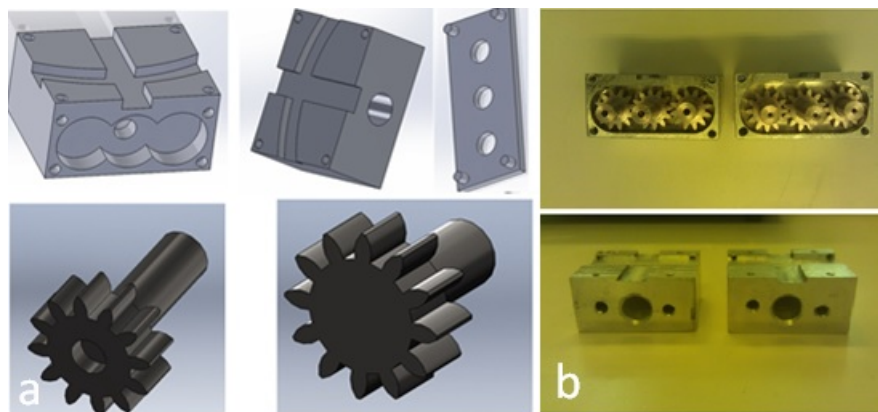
a) Target holder and rotation system drawings designed to place cylindrical catheter shafts (up to three samples) in “Solidworks” CAD program. b) Picture of fabricated 3 target holder prototype.
